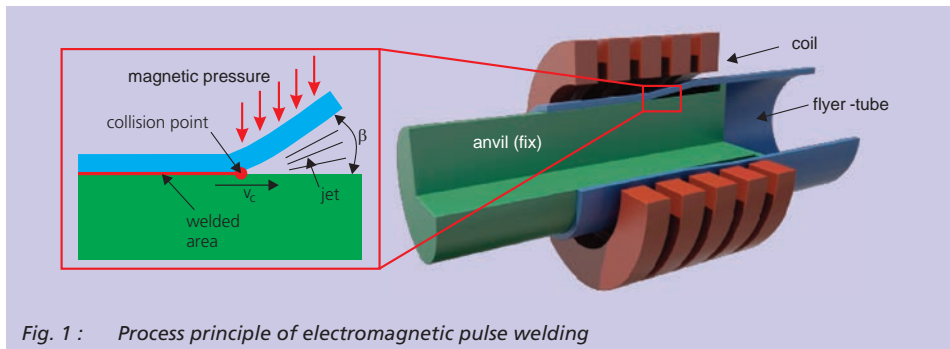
Process principle of electromagnetic pulse welding
